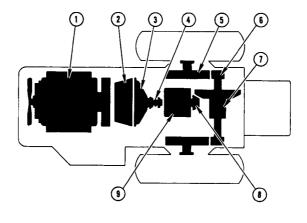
TOURNAPULL DRIVE SYSTEM 4. Universal Joint
